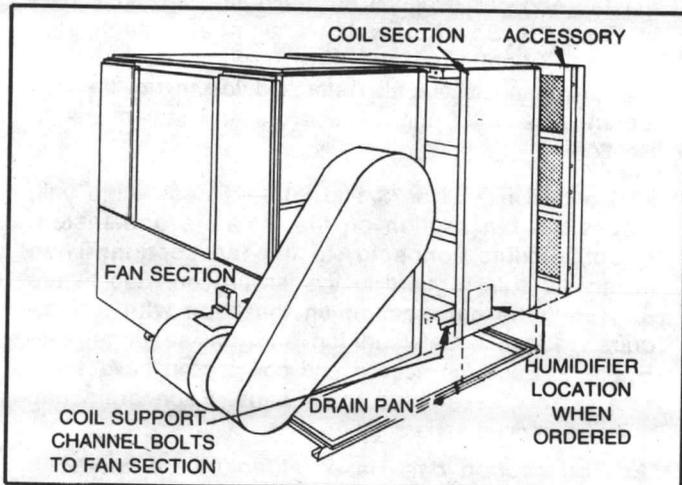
Exploded View of the Horizontal Draw-Thru Unit Size 63
